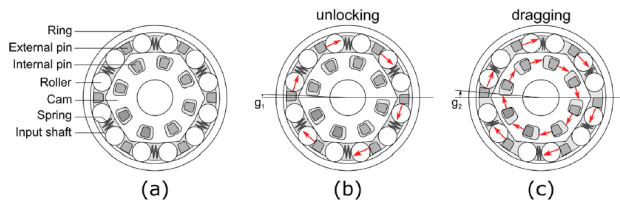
Roller non-backdrivable mechanism at rest (a), during unlocking (b), and in the rotating mode (c) [5]
